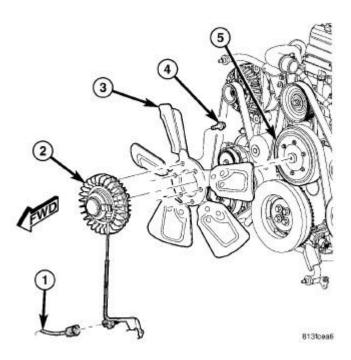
Fan Blade/Viscous Fan Drive Courtesy of CHRYSLER GROUP, LLC
